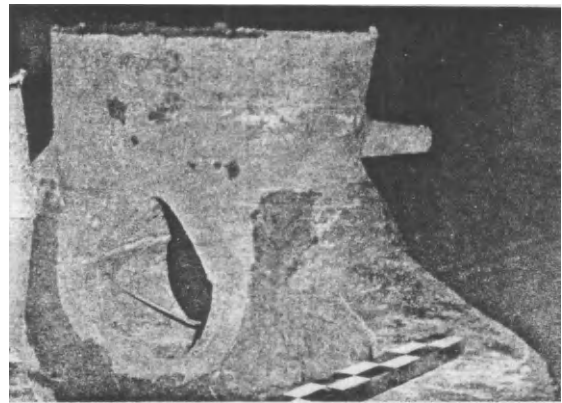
mm, modulus 2.5 cm, feeder head modulus $2.5 \times 1.2 = 3$ cm. This modulus must not be exceeded at the point of attachment of the feeder, even by pads, otherwise a larger feeder would be necessary. Padding forms a special form of ingate (for calculation, see Chapter 4), so that the pad modulus must lie between that of the casting and feeder. According to Fig. 145, the modulus of the feeder will be attained with a length of pad (= wedge length) which corresponds to:
